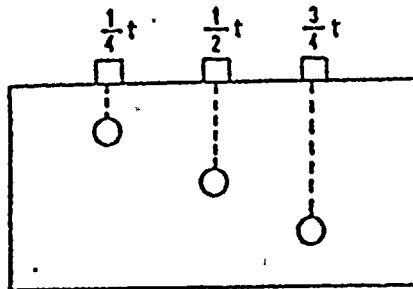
Ultrasonic Examination of Closure Head to Instrument and Safety Valve Nozzle Welds.
